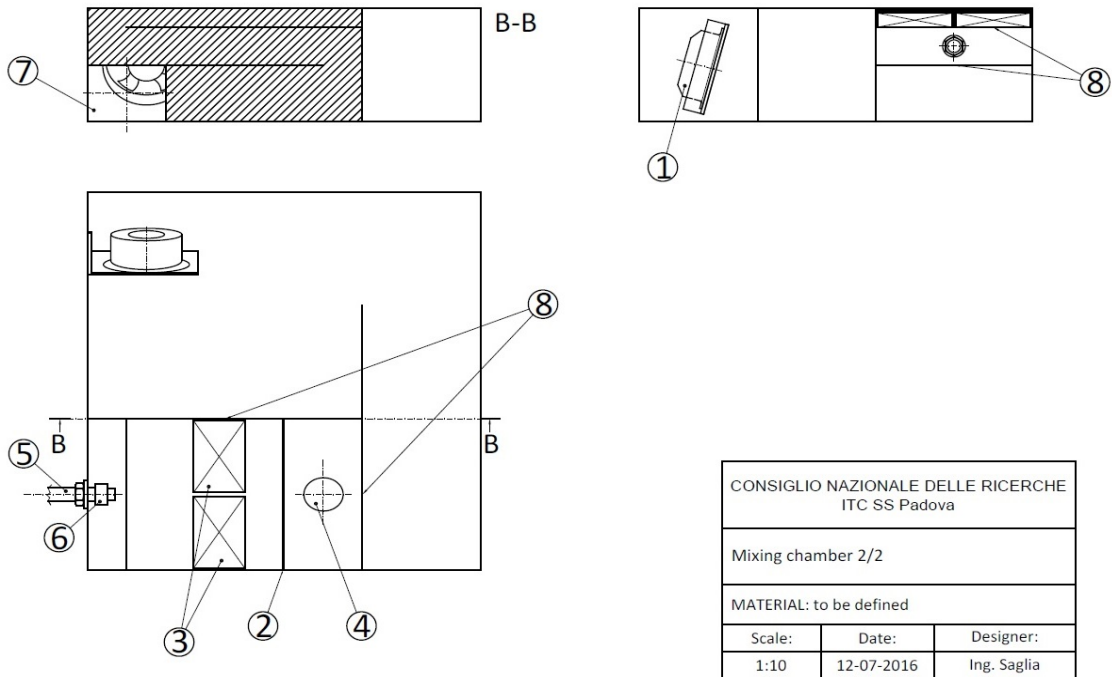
Mixing chamber. 1) EBM fan; 2) Perforated screen; 3) Electrical resistance; 4) Mixing chamber inlet hole; 5) Steam injection tube; 6) Silencer; 7) Passage hole; 8) Separation plate
